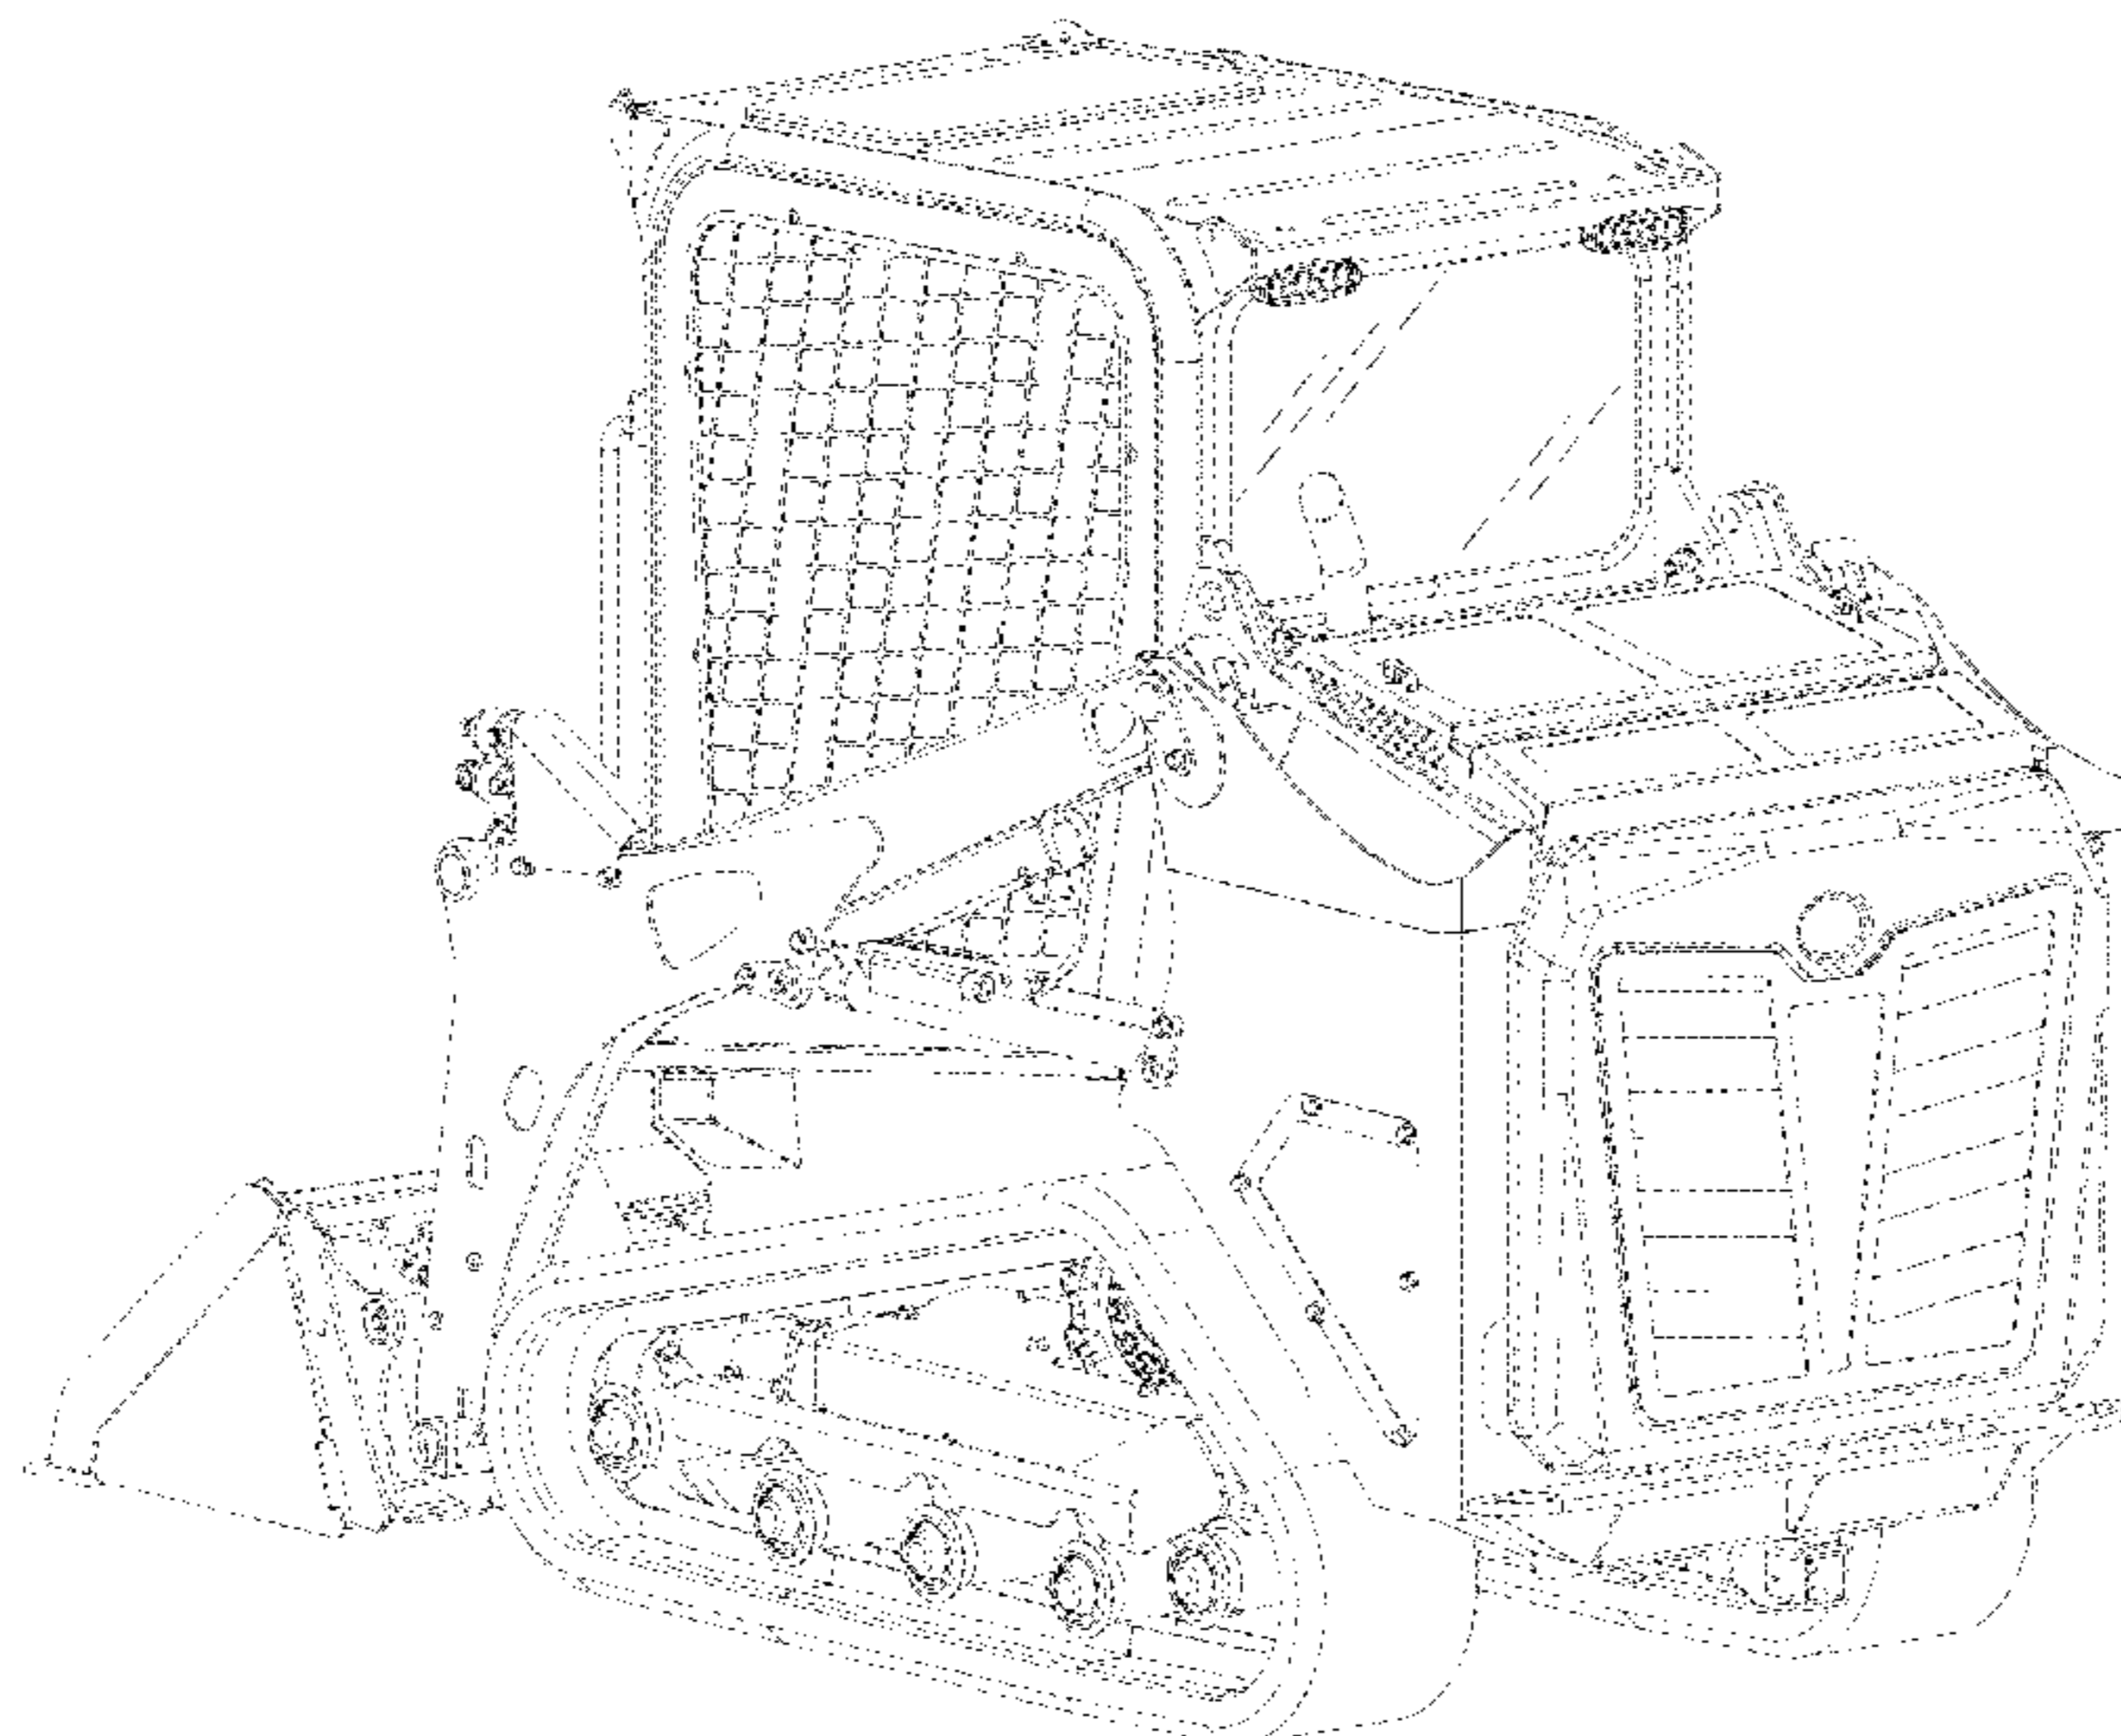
is a rear left perspective view of a loader machine frame showing our new design in an environment in which it may be used;
